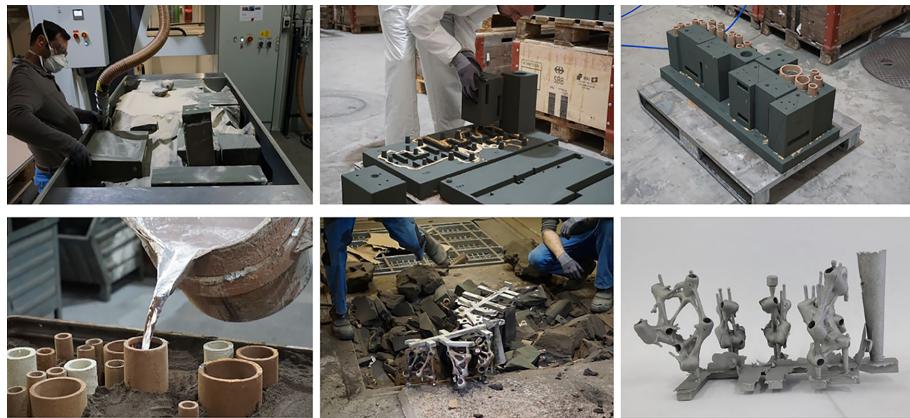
a) Unpacking of 3D printed sand molds, b) Assembly of multiple molds on a gating system c) 3D printed mold with casting systems, d) Casting process e) Demolding using vibration platform of gating system, f) an array of metal nodes with ingate system.
